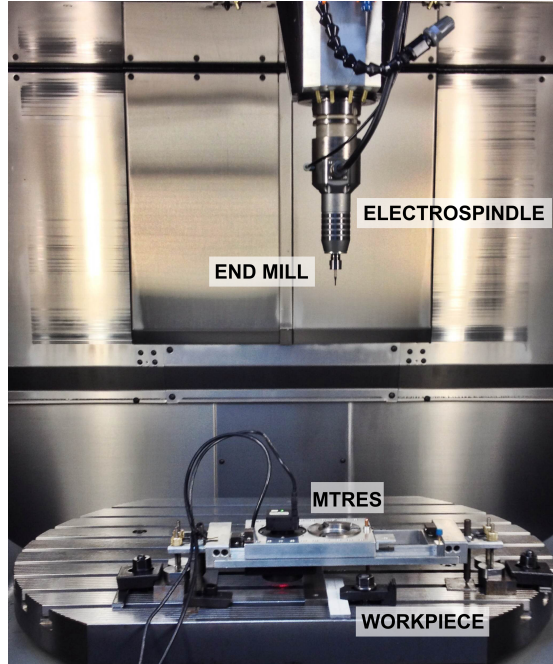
Drilling experiments key elements mounted on the machine tool table.
